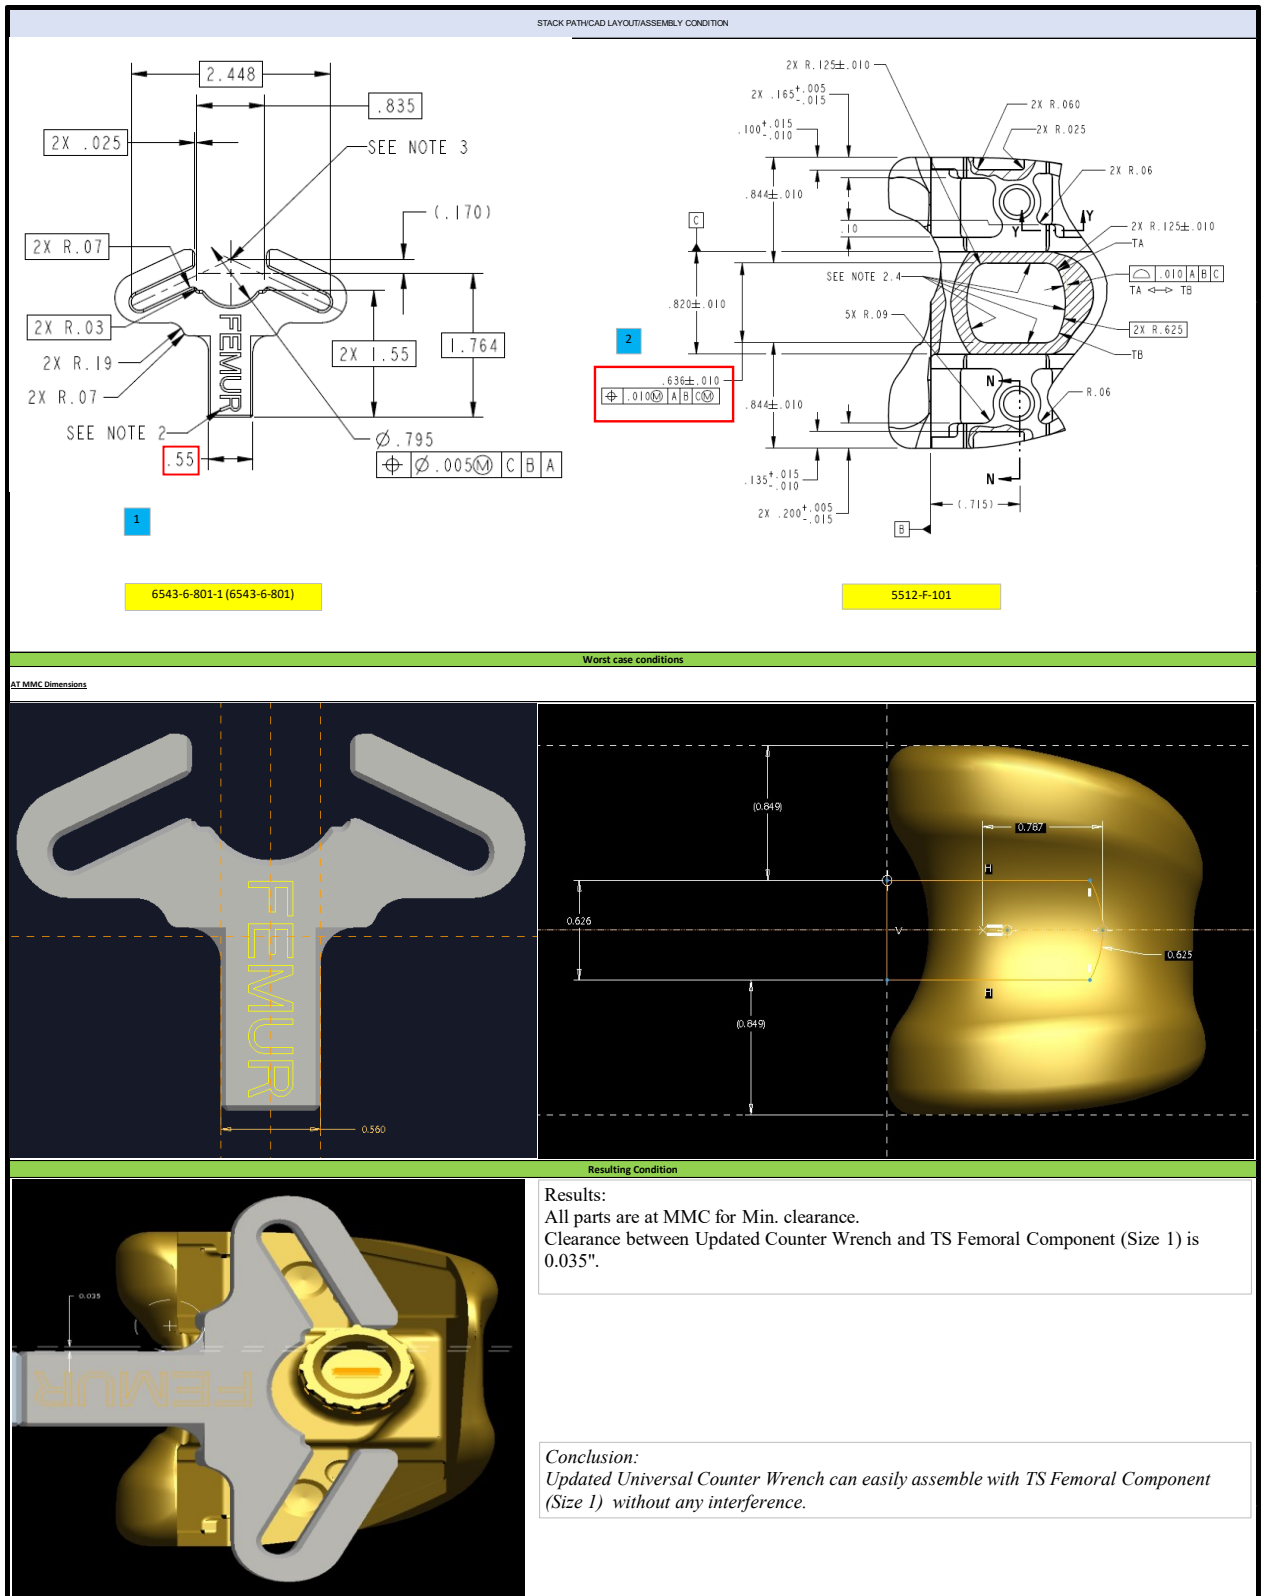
Assembly of Universal Counter Wrench with TS Femoral Component size 1 (Tolerance report T04XXX)
